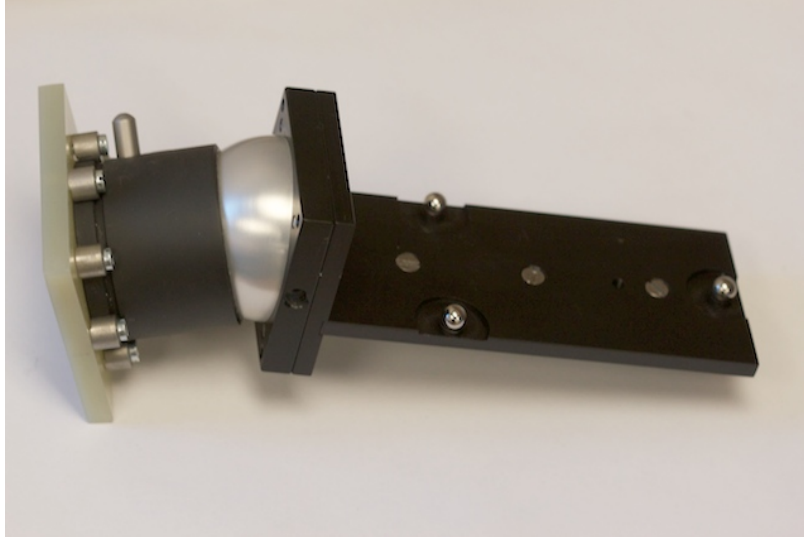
The right-angle mount, ball-and-socket stage, and G10 plate which constitute the upper BCAM mounting hardware. The three ball bearings can be seen sitting in place on the kinematic mount. The right-angle mount is reinforced with a spine (not visible in this image) on the rear of the kinematic mount.
